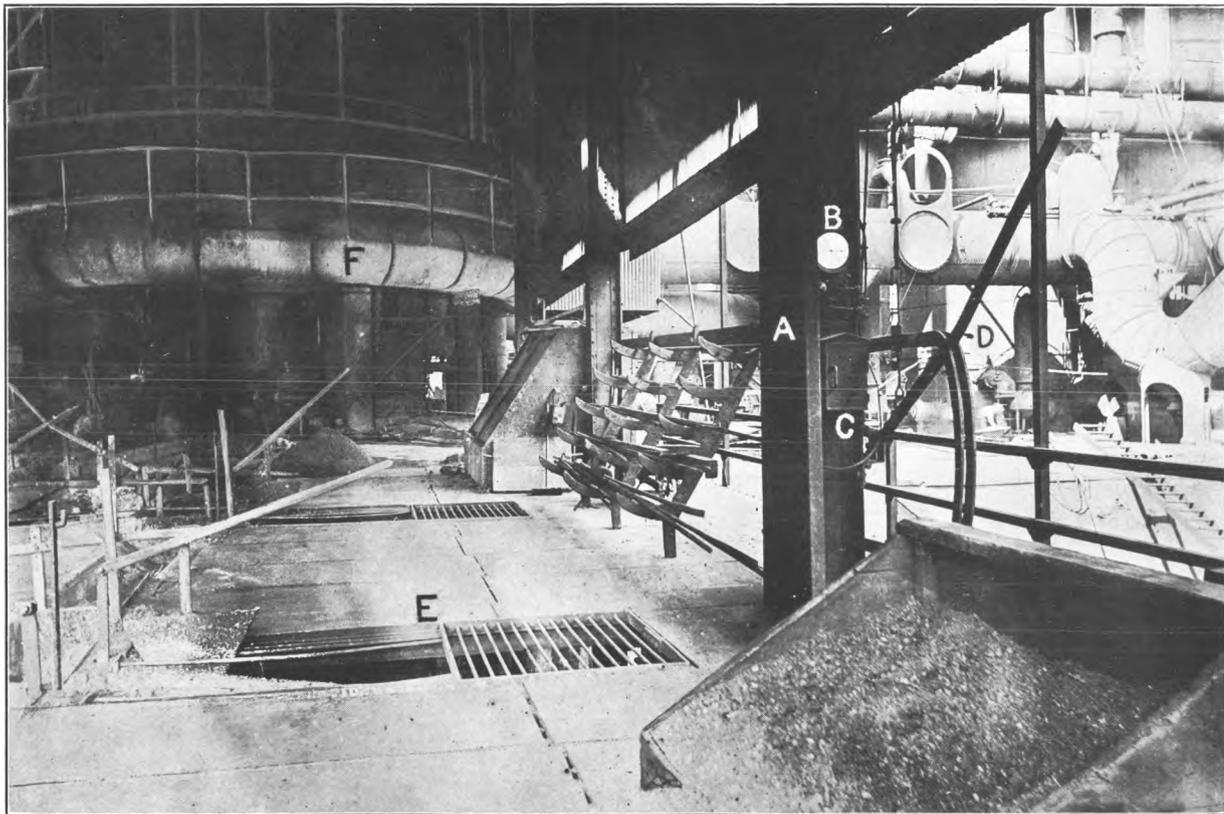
PORTION OF CAST HOUSE FLOOR
